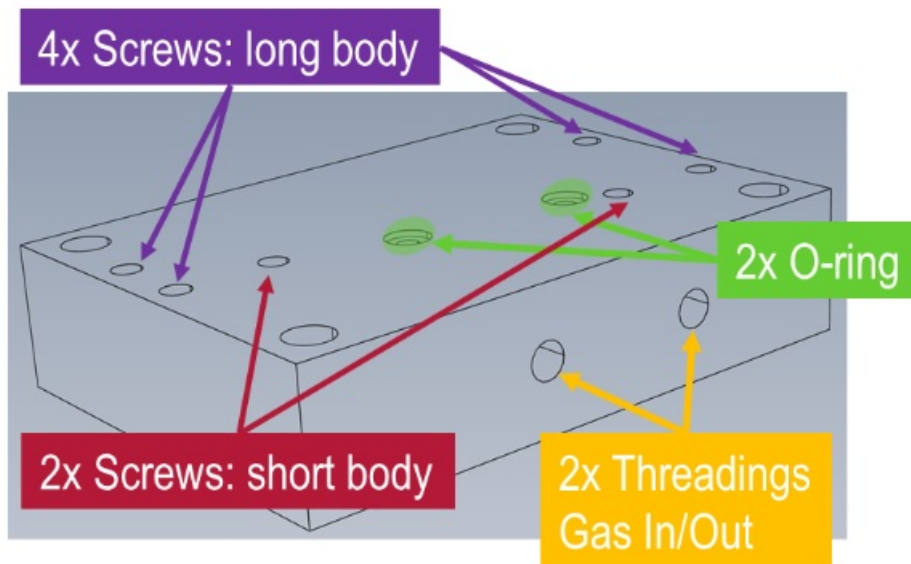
Suggested manifold design for SFC53xx / SFM53xx
